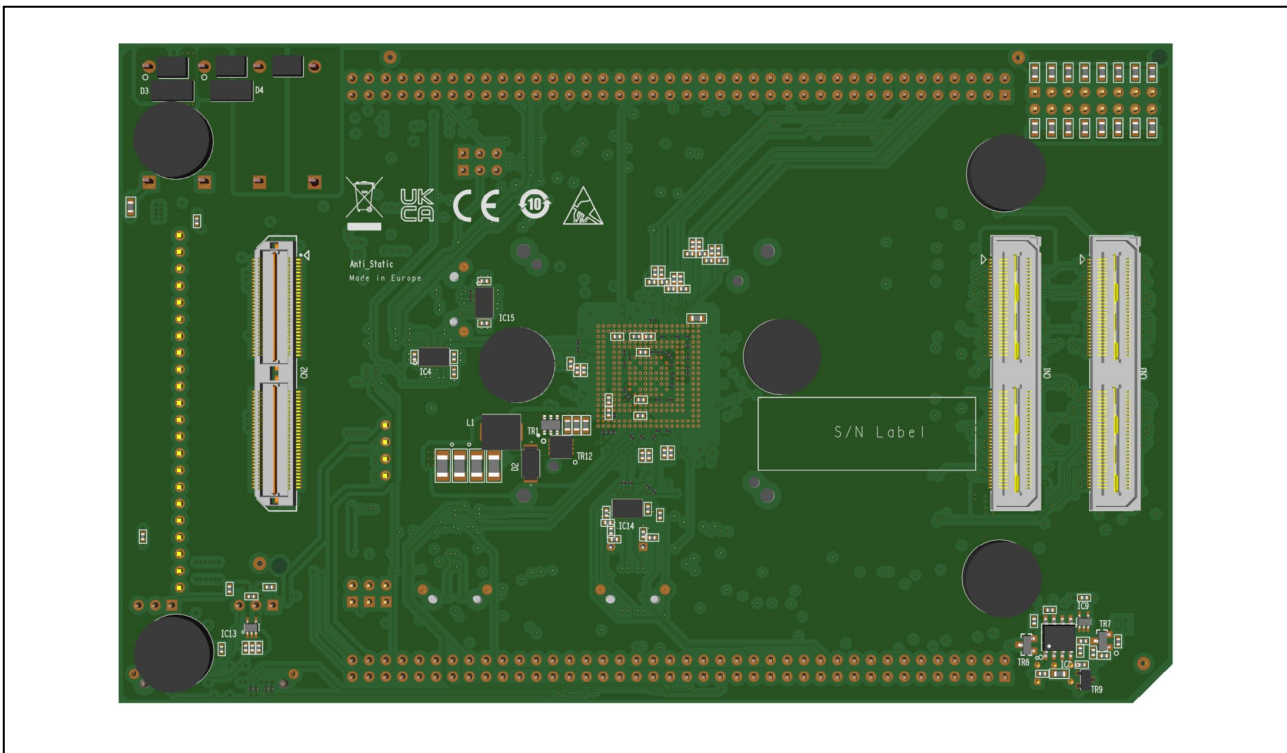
D018567_06_V01 Piggyback board bottom view
